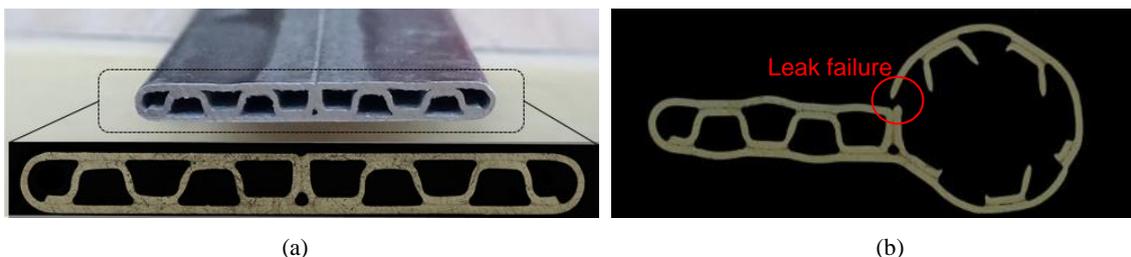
Hydraulic pressure test: (a) braze folded tube; (b) folded tube after hydraulic pressure test
